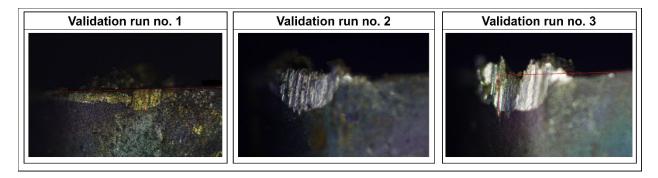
Microscopic view of the flank face of the cutting tools in validation runs
